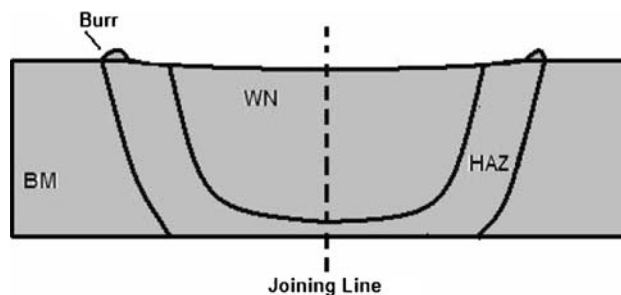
Schematic of FSW cross-section showing base metal (bm), heat affected zone (haz), and weld nugget (wn)
